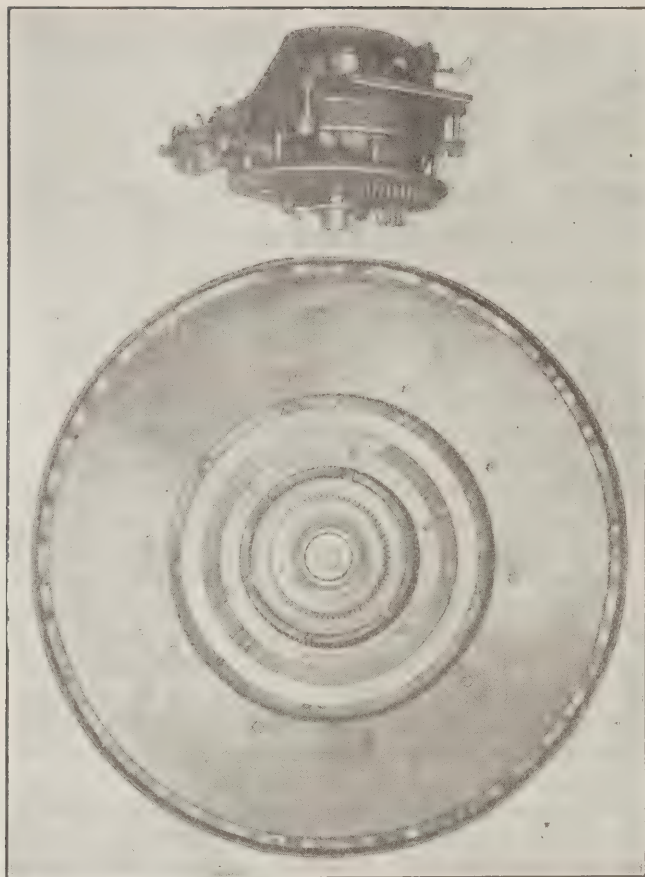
REEL MOTOR AND BOTTOM OF CABLE REEL
